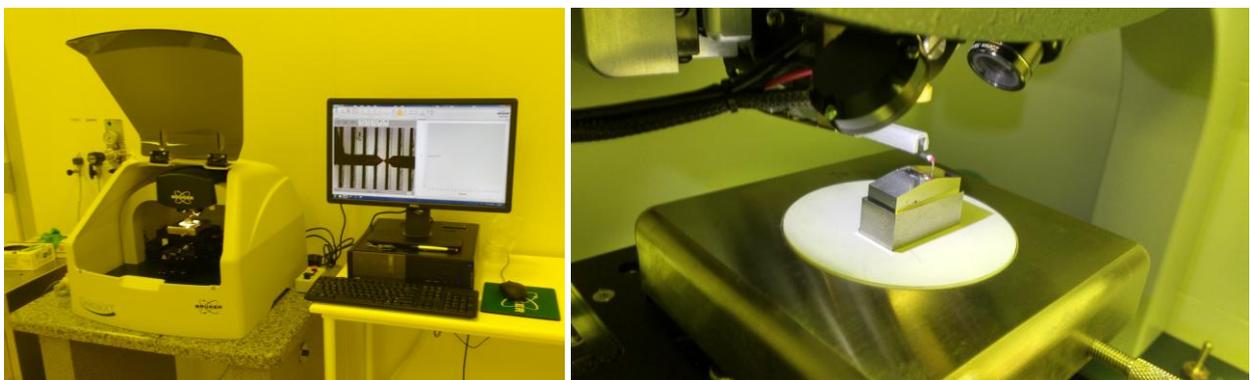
Stylus contact profiler (left picture) used for measuring step height and surface roughness on test samples machined on the ultra-precision machining center (right picture).
